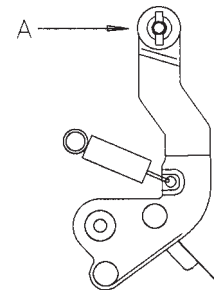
Removal of tension band when measuring the rewinding playback (VS-REW) winding torque
